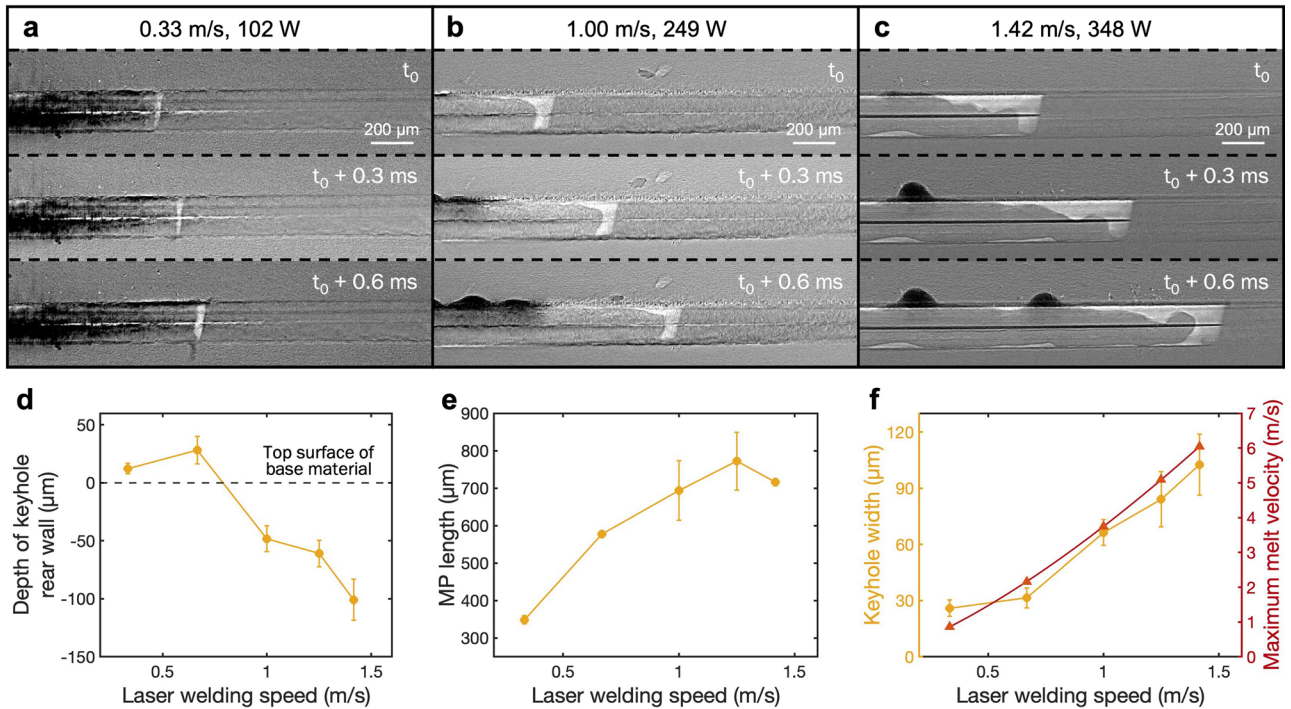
| In situ synchrotron X-ray observations and keyhole/molten pool measurements during laser welding. a–c In situ high-speed synchrotron X-ray observations of laser welding at the welding speeds of 0.33, 1.00, and 1.42 m/s at times t_0 , $t_0 + 0.3$, and $t_0 + 0.6$ ms, where t_0 was arbitrarily selected. See Supplementary Movies 1–5 for in situ observations at five different welding speeds.
